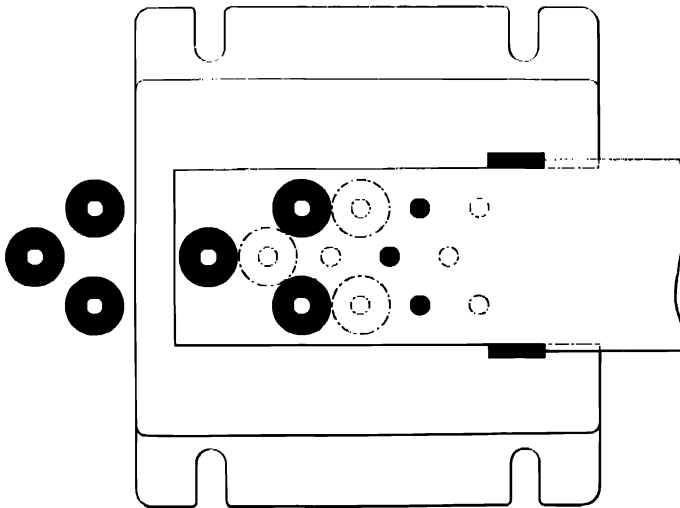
Mode of piercing and blanking washers from roll-fed strip.
